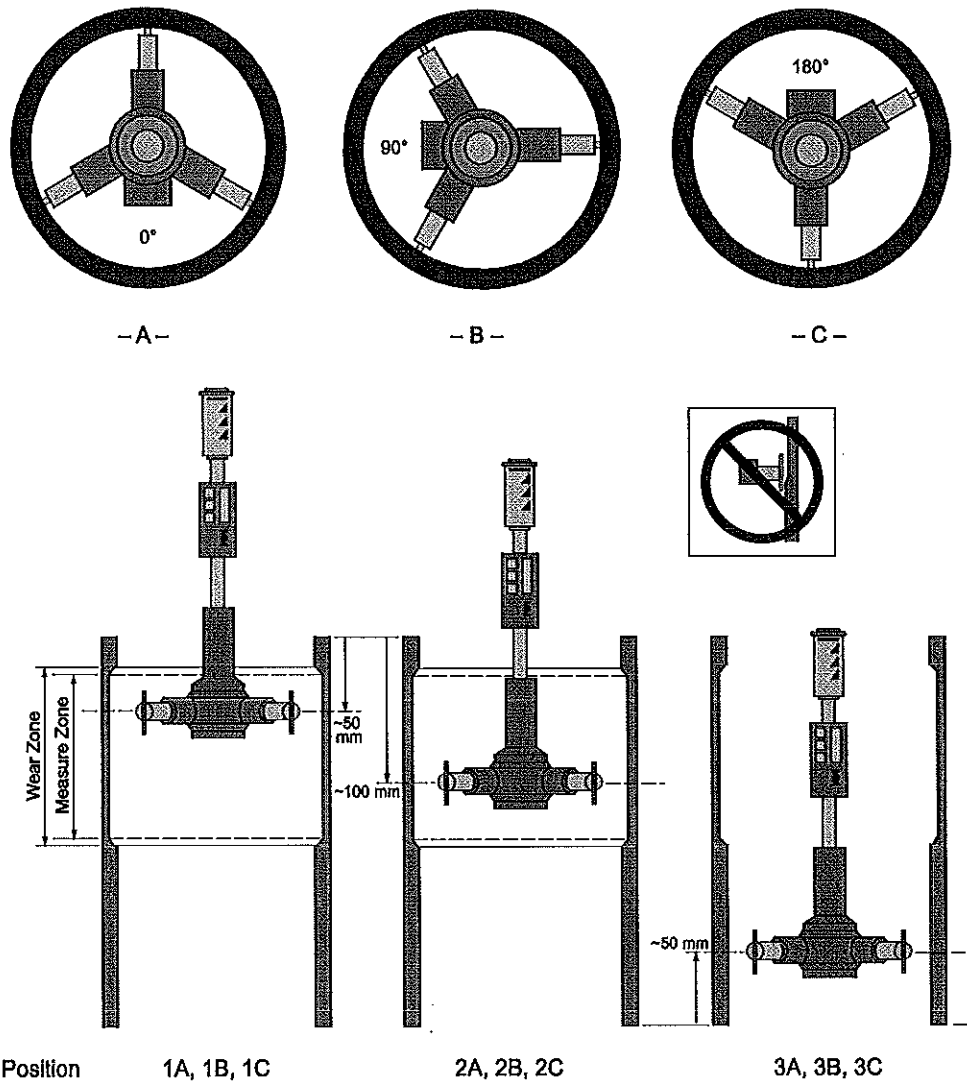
Bore Gauge Measurement Positions within the Mold Bore
